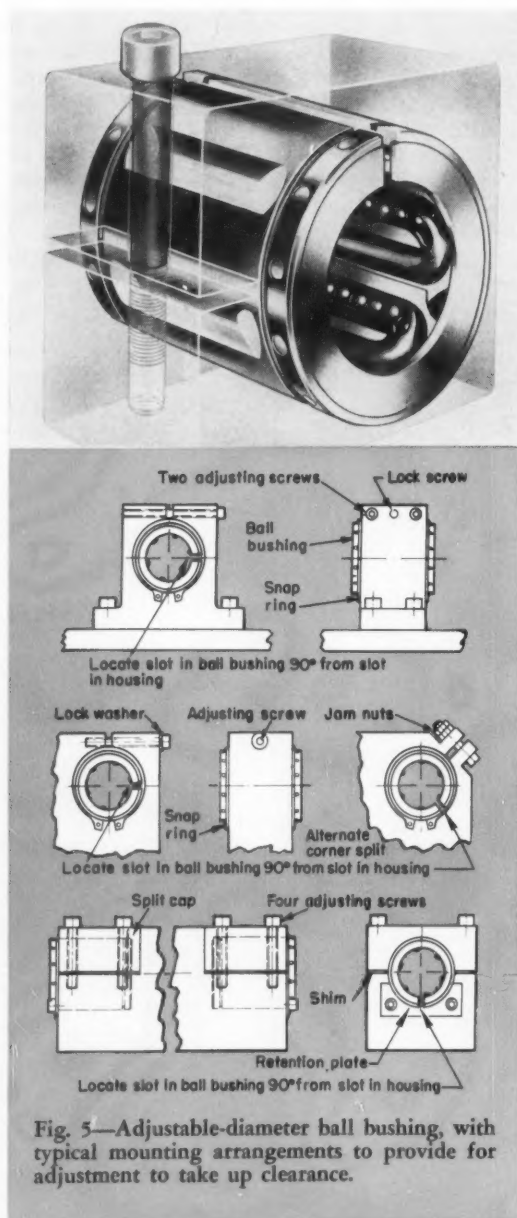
Adjustable-diameter ball bushing, with typical mounting arrangements to provide for adjustment to take up clearance.
